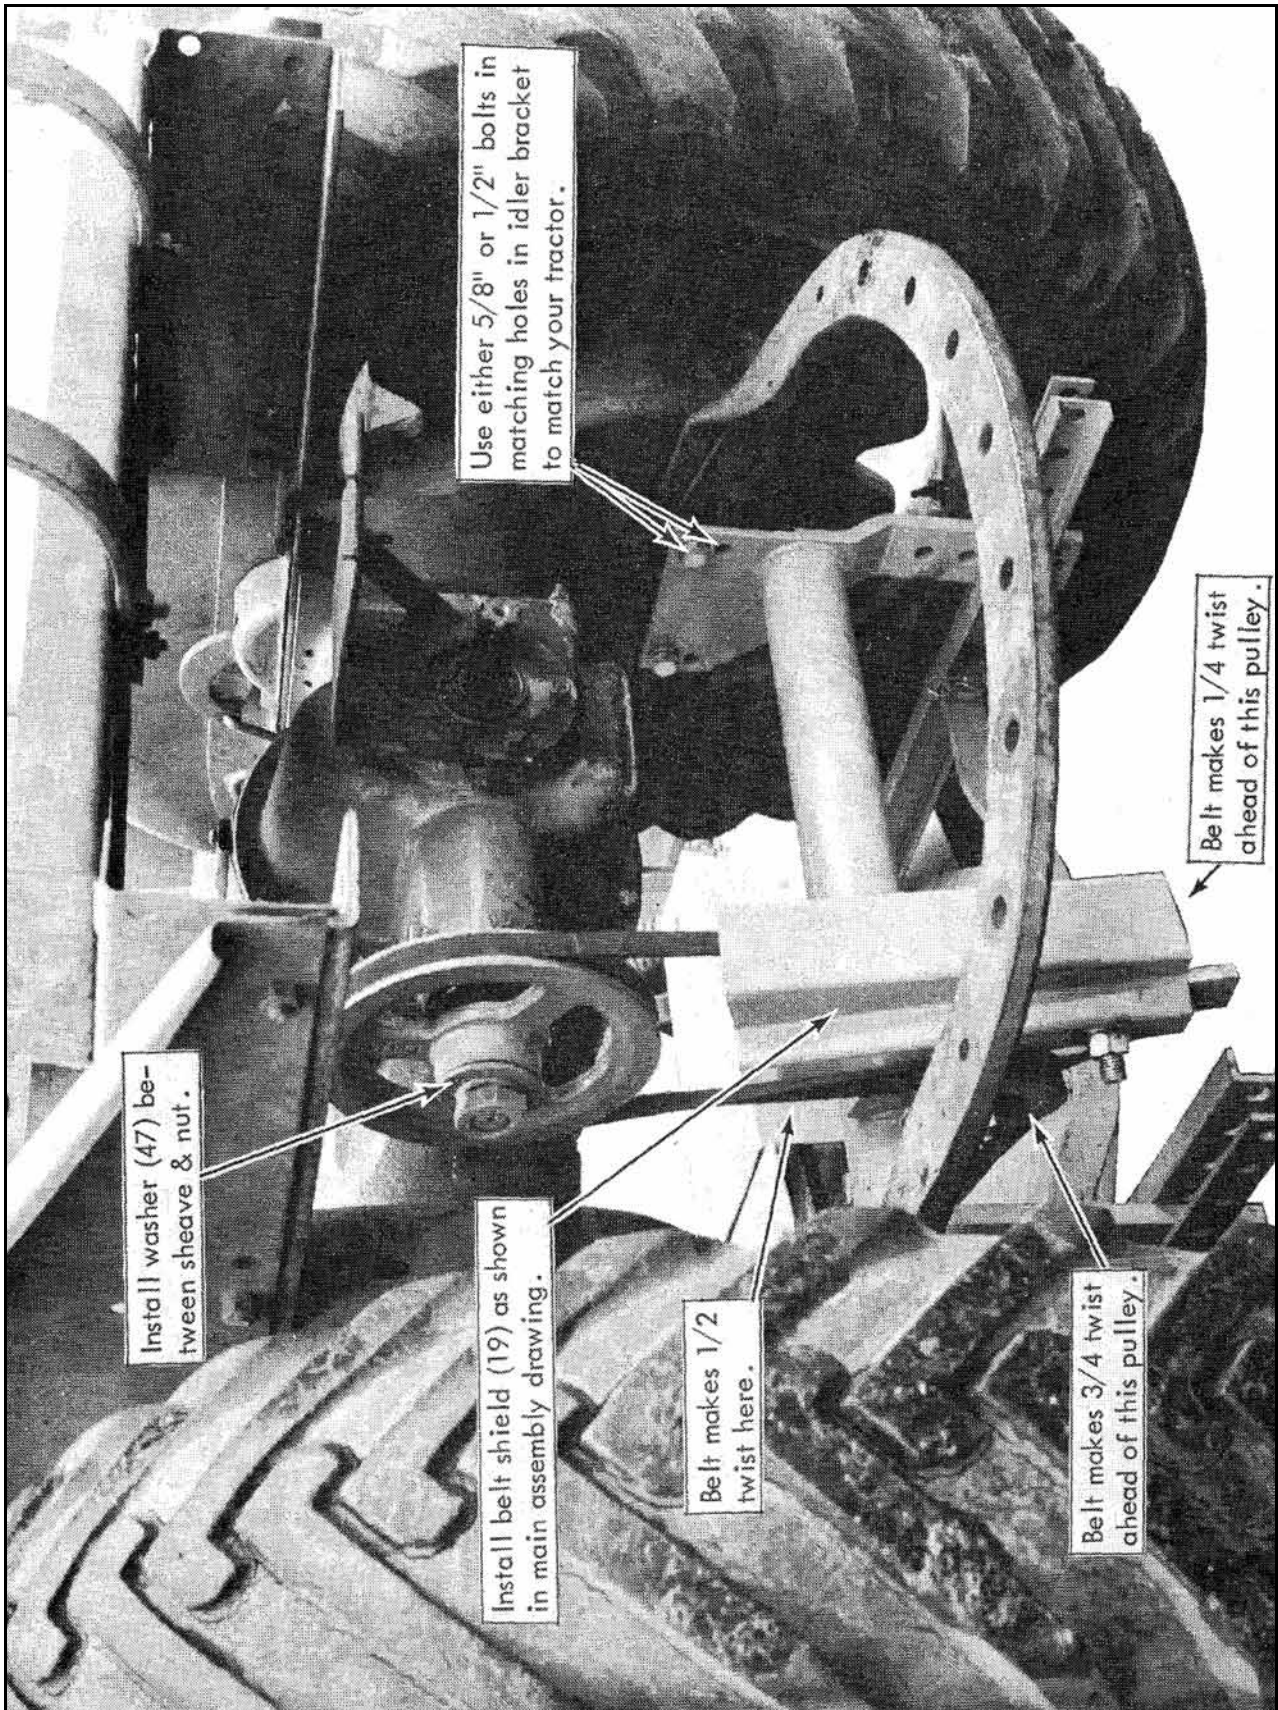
L59-AC/C & L306-AC/C Mounting Frame Assembly Photo
